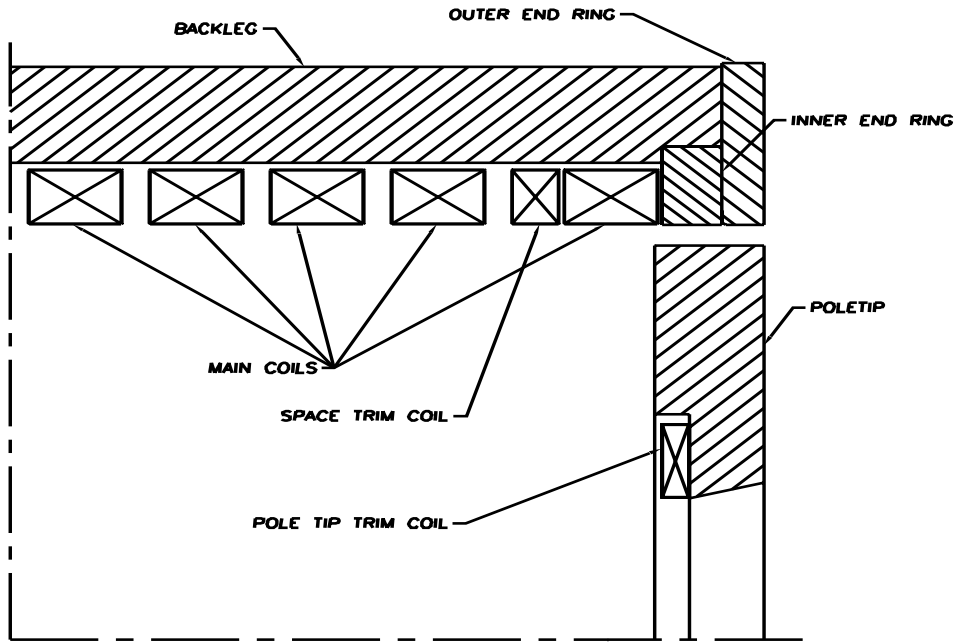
Section drawing of magnet steel and coil locations. Dimensions are given in the text.
